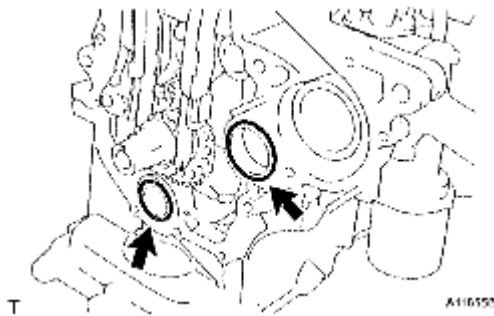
Locating O-Rings From Cylinder Block And Oil Pan Sub-Assembly
